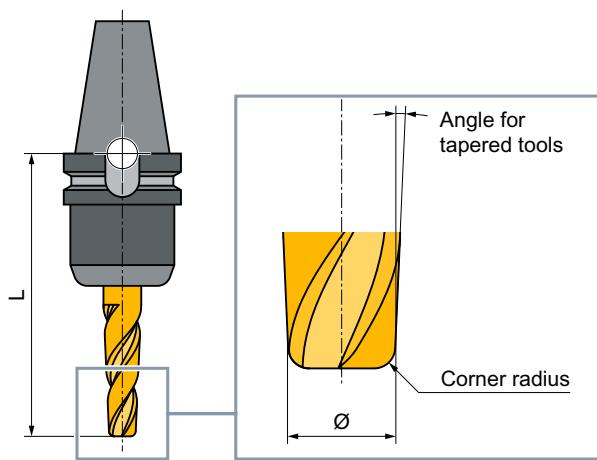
3D tool with an example of a bevel cutter with corner rounding (Type 156)
